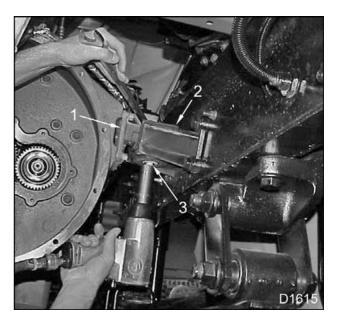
Removal of through bolt from rear engine mount in chassis mounting bracket
